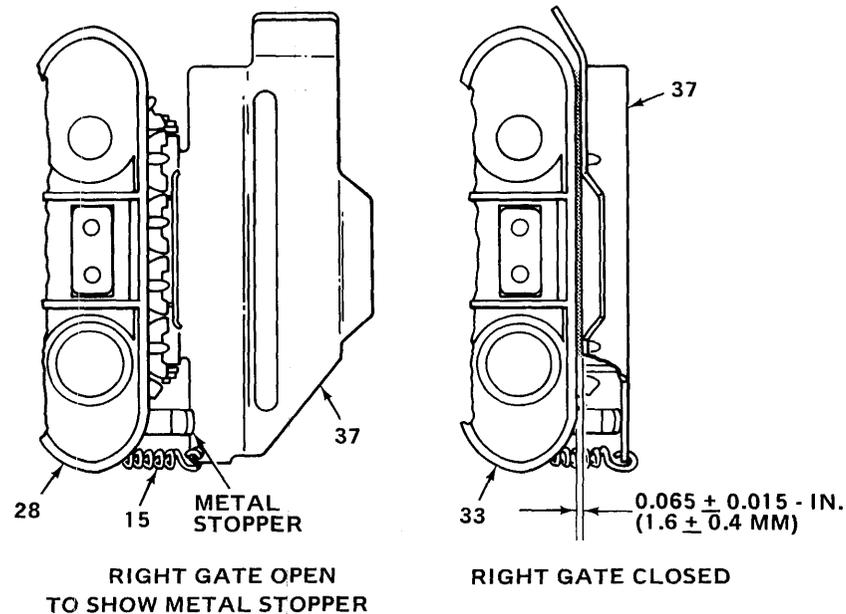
ADJUSTMENT FOR PAPER HOLDER GATE
